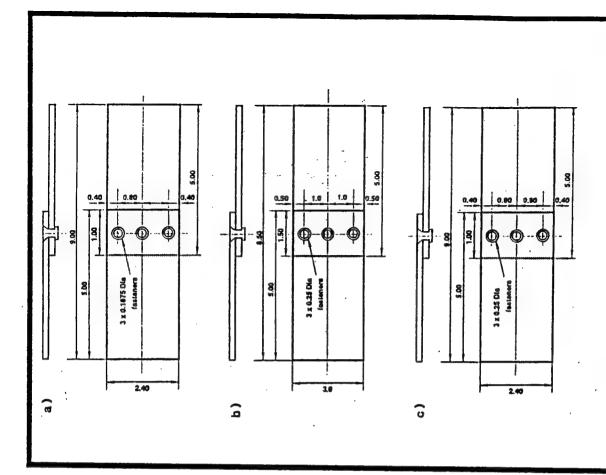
Schematics showing dimensions of aluminum lap joints: (a) thickness = 0.060 in. (b) thickness = 0.080 in. (c) thickness = 0.1 in.
